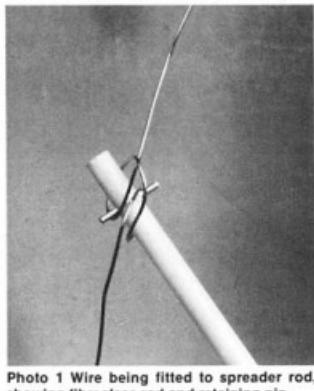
Wire being fitted to spreader rod, showing fibreglass rod and retaining pin.
